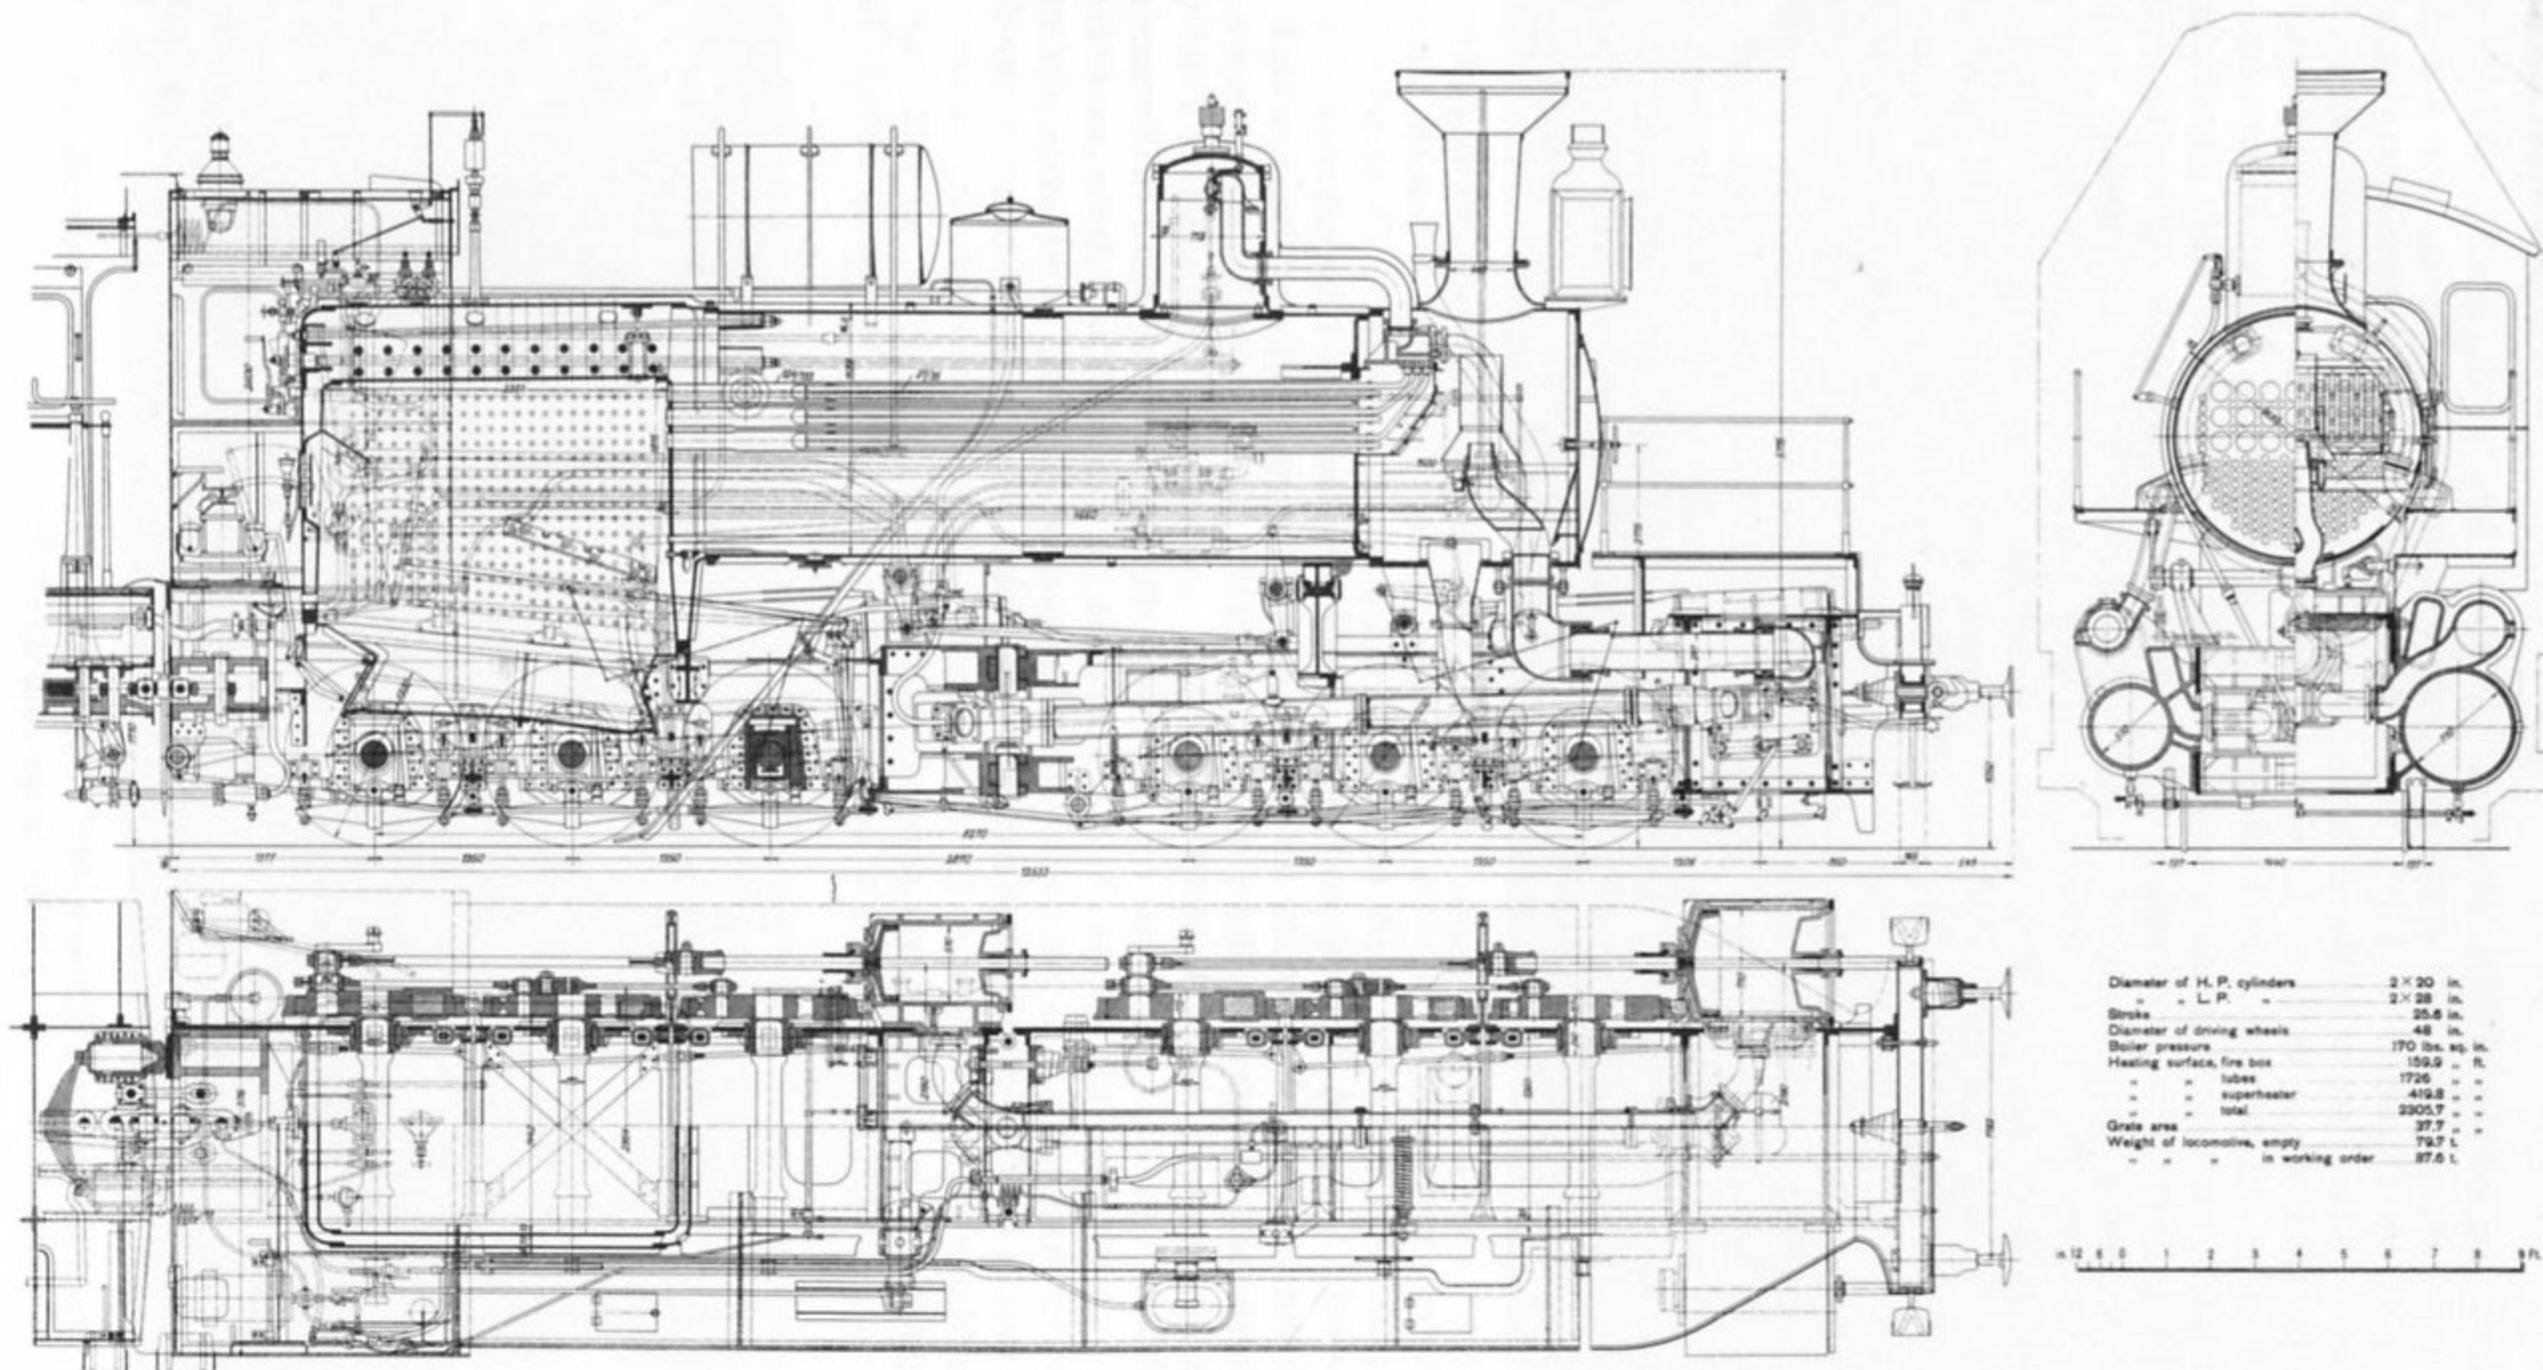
General arrangement drawing of Moscow-Kazan Railway superheated 0-6-6-0, built at Kolomna and Putilov works, showing chassis joint, steam pipes, etc
